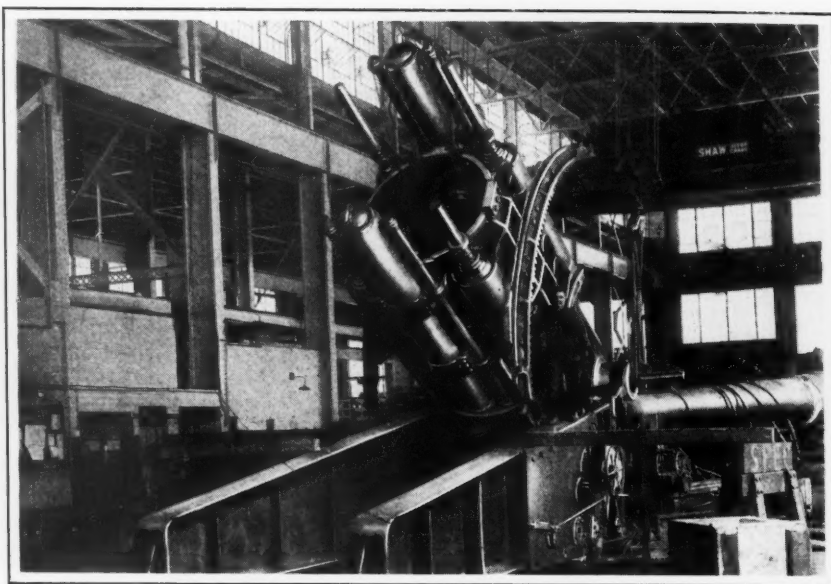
Mounting the Cradle of a 16-inch Barbette Gun Carriage in the Side Frames
